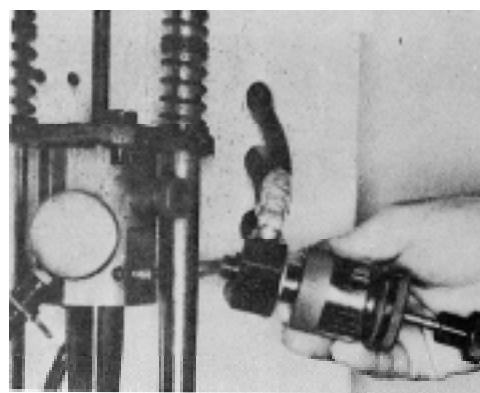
, F60214. ST-708 installed in inlet connection
